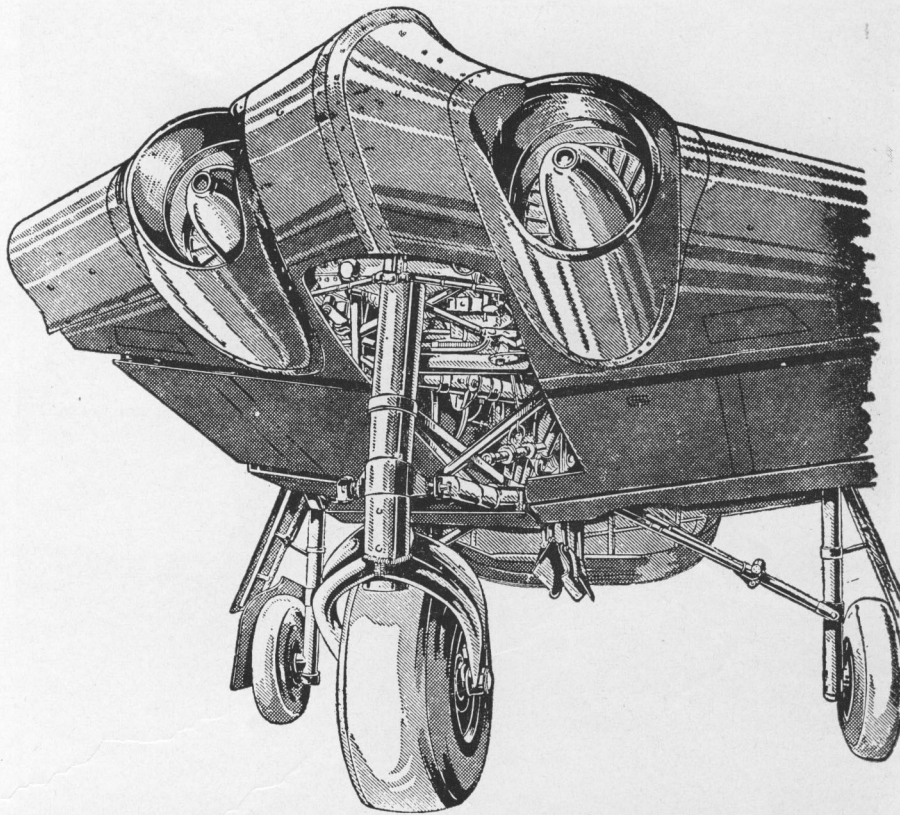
Center section of the Horten 229 jet-propelled flying wing developed by the Germans shortly before their defeat. The landing gear retracts hydraulically, with the nose wheel making a 90-deg turn to lie flat in the well, and the main wheels moving inward. This craft was designed to be powered either by BMW-003 or Junkers Jumo-004 axial-flow gas-turbine jet engines.
